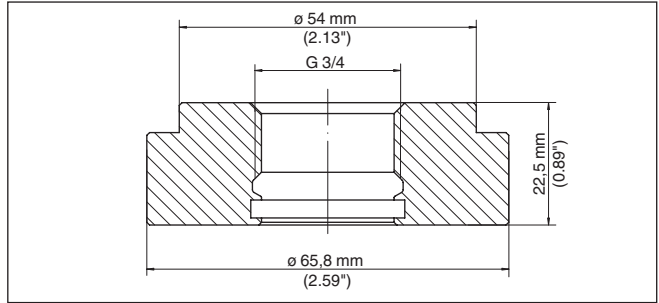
Dimensions adapter G $\frac{3}{4}$  (DIN 3852-X) on DRD
